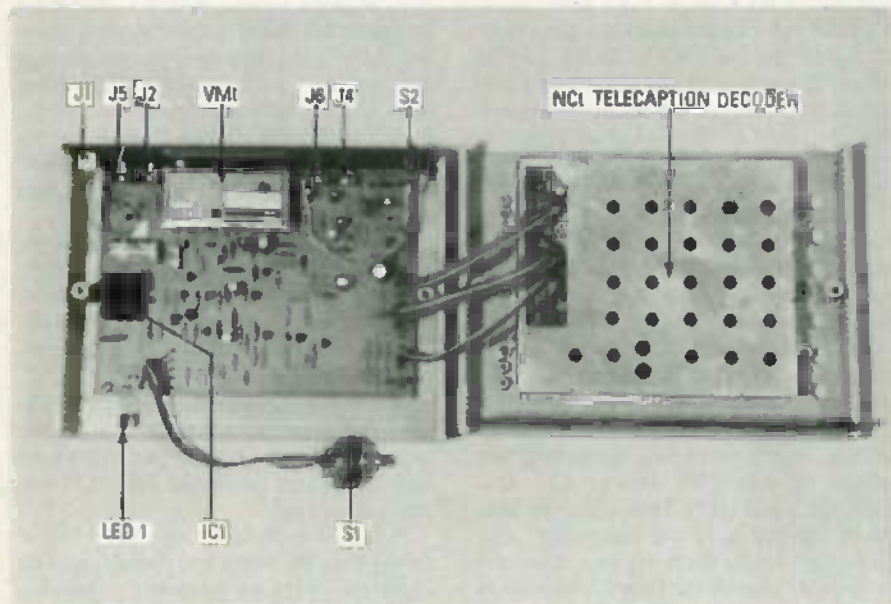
THE PC BOARD MOUNTS IN THE BOTTOM of the case and the NCI decoder module mounts in the top. Make sure that the three jumper cables connecting the PC board and the module are oriented correctly.
